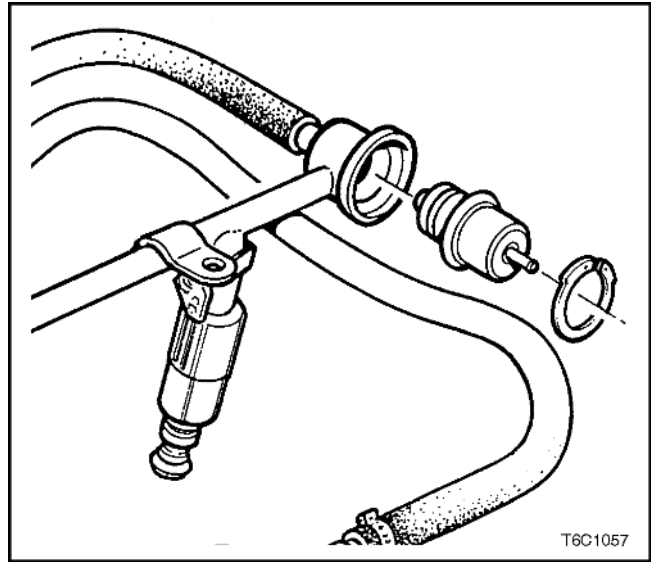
C1-3-46 V6 Engine Fuel Pressure Regulator Removal From Fuel Rail
